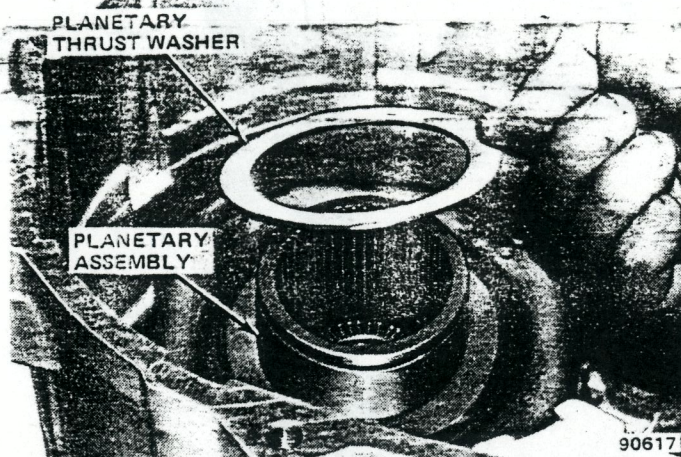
D-22 Planetary Thrust Washer and Planetary Assembly
